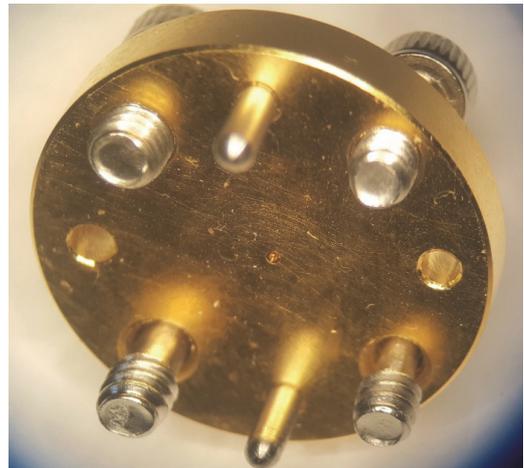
Flange side of an Anritsu 33WG50 prototype 1-mm (W1) Male to 0.6-mm Flange adapter
